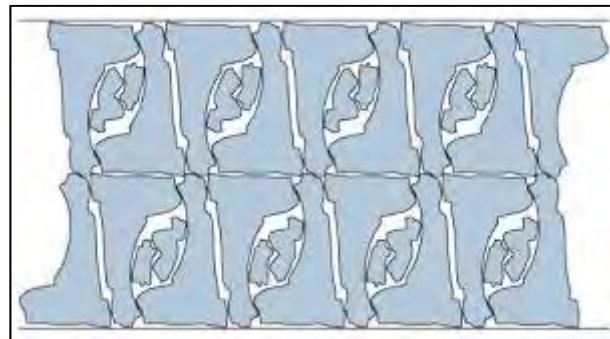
E-4: Schematic of 3 different blanks to be laser blanked from the same coil to minimize engineered scrap. Not only is engineered scrap minimized, but the superior edge condition significantly reduces the potential for edge fracture. ^{M-7}
